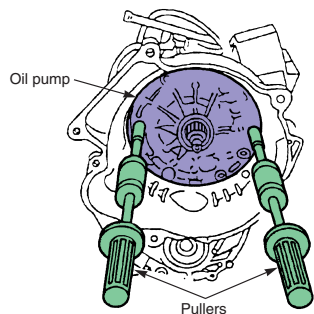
Some pumps can be removed by pushing them out from the rear. On many transmissions and transaxles, however, the pump cannot be reached from the rear and must be removed with a slide hammer or special puller. (Ford)
